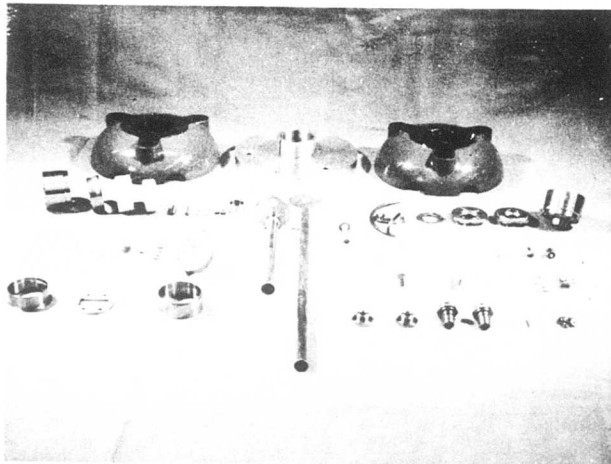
COMMON PARTS AND ASSEMBLIES TUBES 6 THRO
